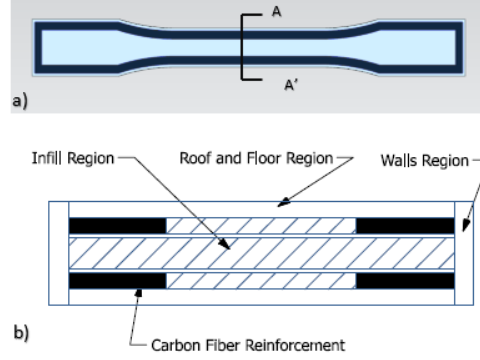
CFR specimen a) Top view b) Cross Section A-A.'
